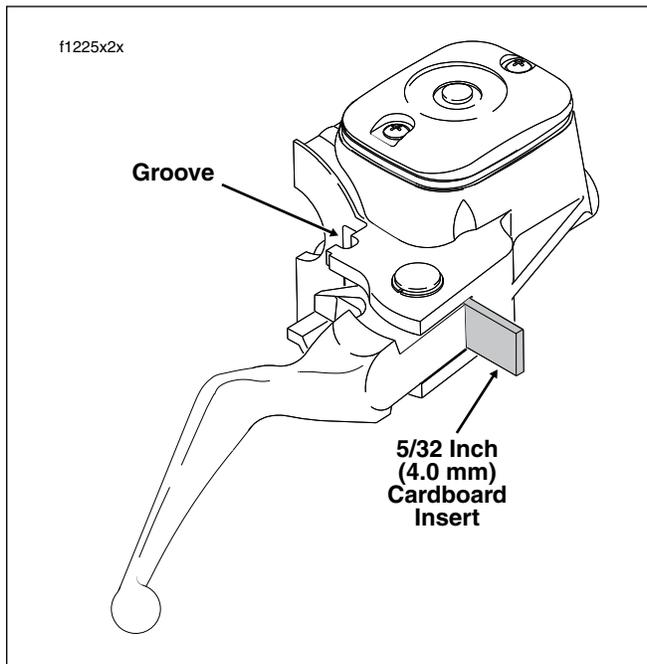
Install Cardboard Insert Before Installing Master Cylinder Assembly
